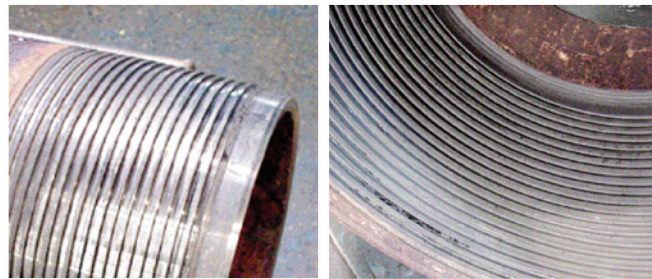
Coupling pin- and box-thread condition after 3 years in stock (after cleaning).
